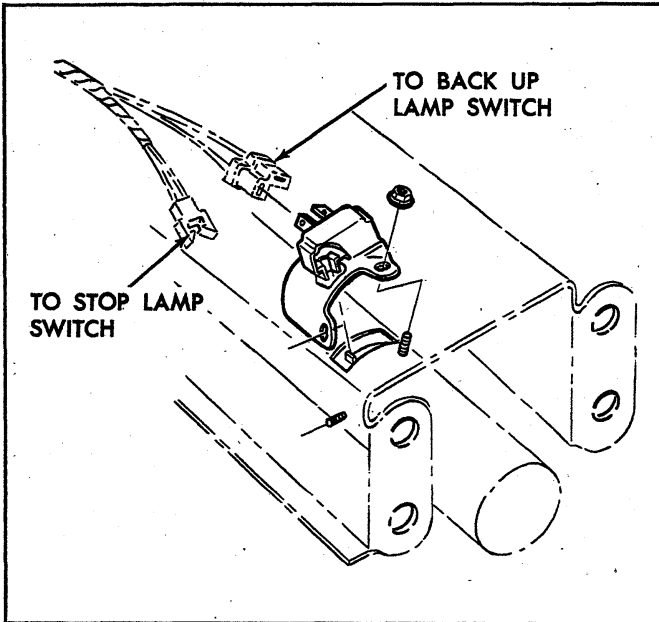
Backing Lamp Switch on Mast Jacket (Chevelle) tray, trim plate assembly, and indicator lens and housing from console.
